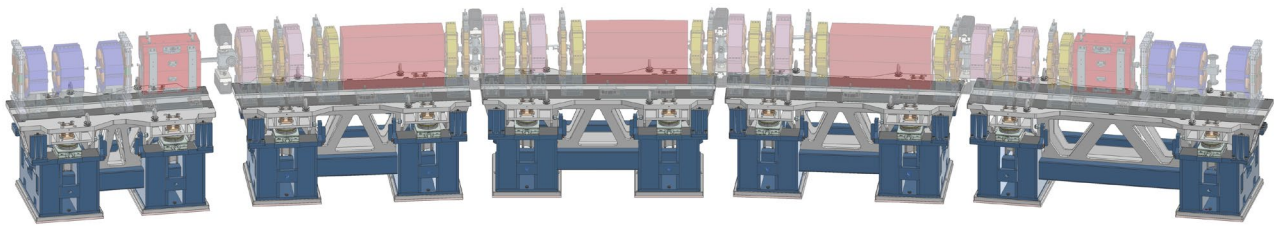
Arc split in 5 girders; 1 short, 3 medium, 1 large.
